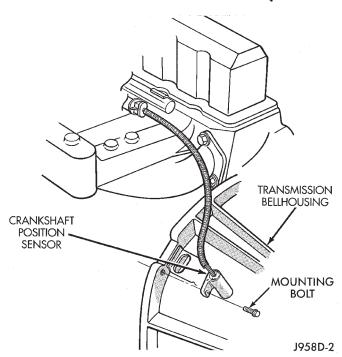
Crankshaft Position Sensor Location—4.0L 6-Cyl. Engine
